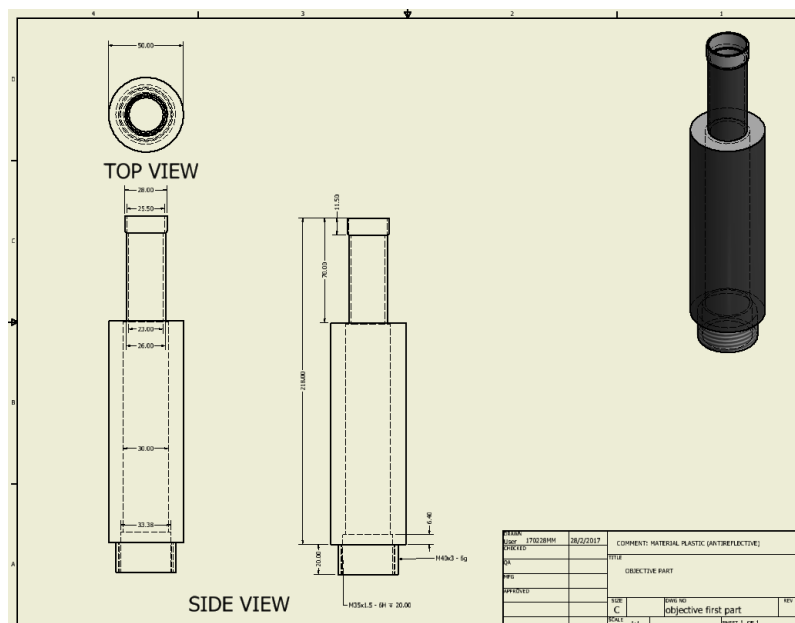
Lens housing opto-mechanical drawing. The opto-mechanical drawing that the machine shop used in order to construct the custom design lens mount.
